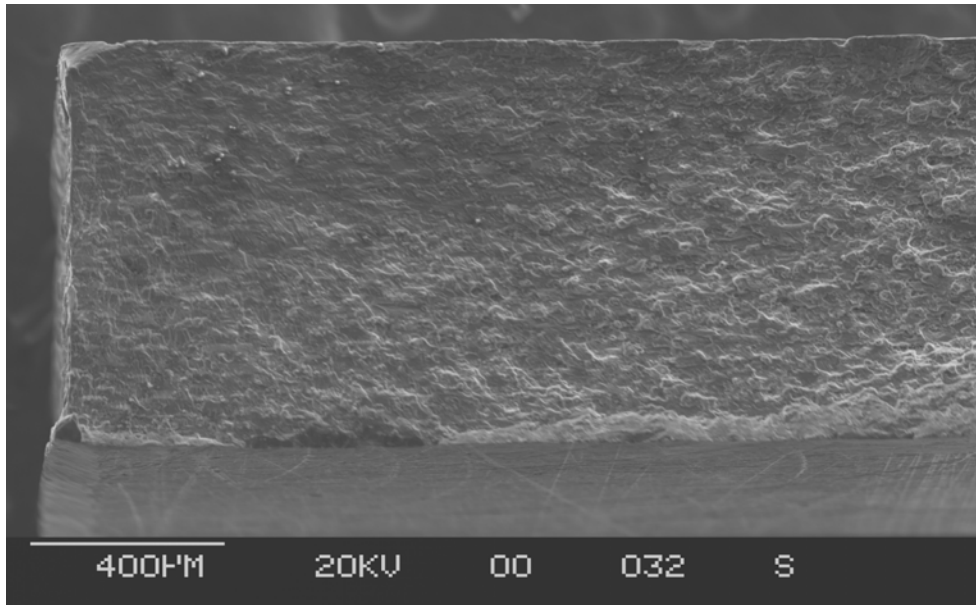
Fatigue Crack on Fracture Surface of Specimen N3.
